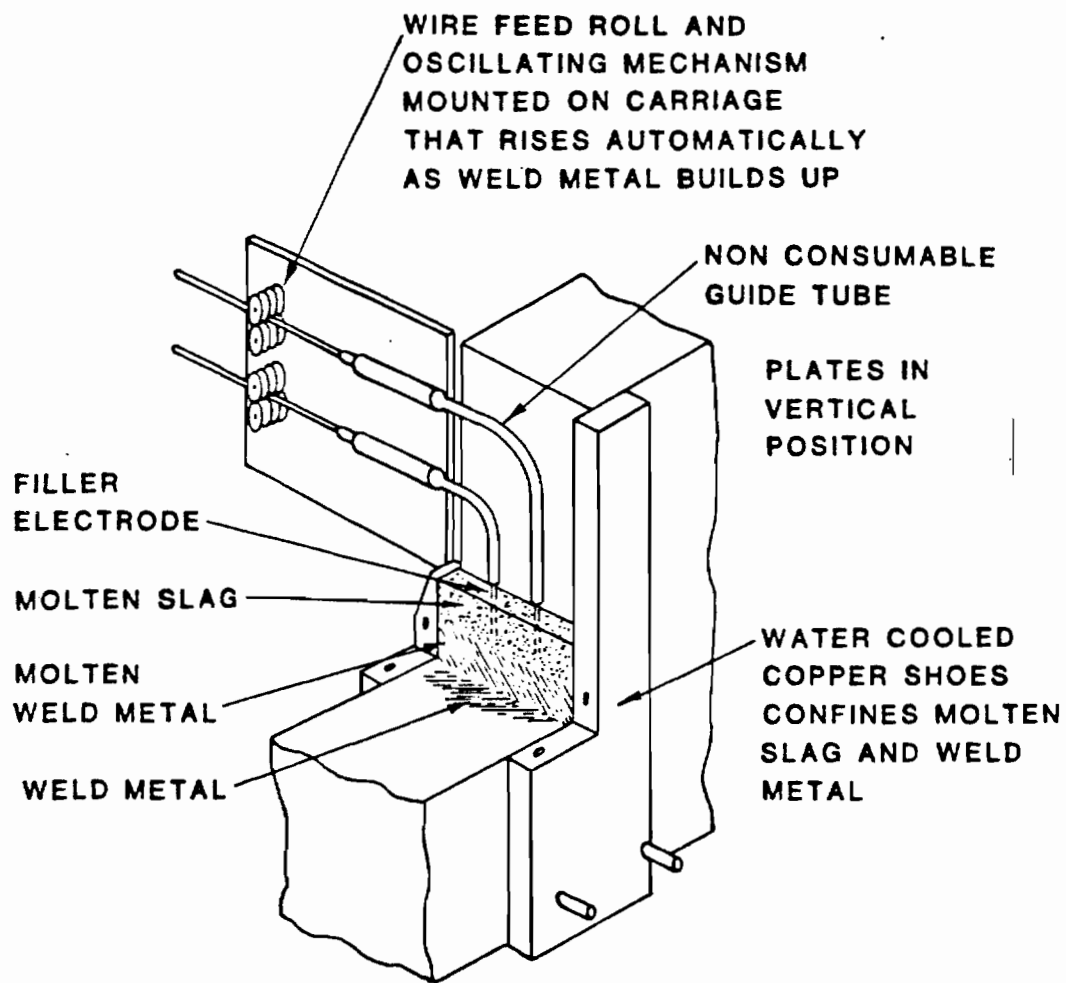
DIAGRAM OF ELECTROSLAG WELDING WITH NON-CONSUMABLE GUIDE TUBE.
